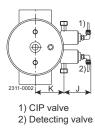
c. Top view 1) CIP valve - 2) Detecting valve
